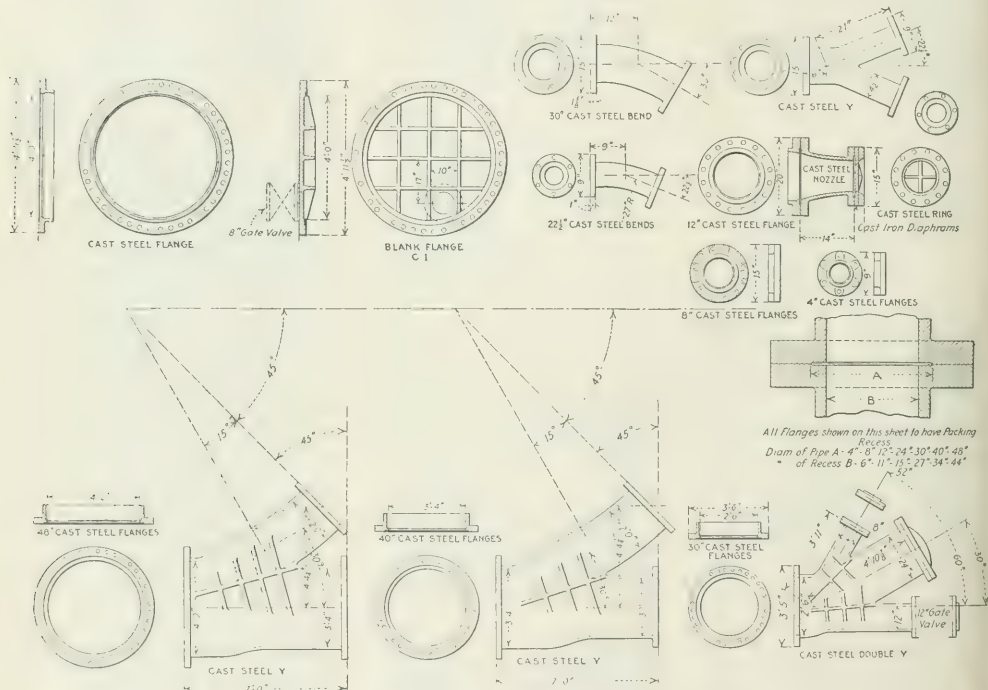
DETAILS OF CASTING FOR PRESSURE PIPE
